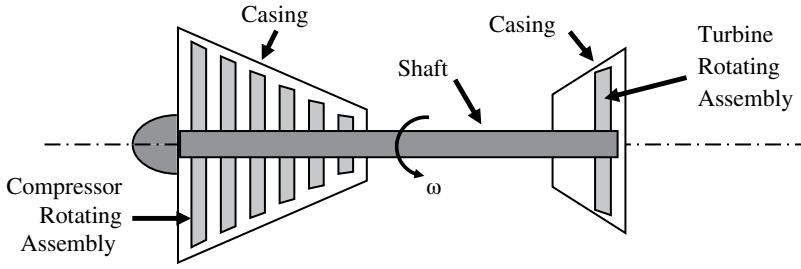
Common shaft in a gas generator connects the compressor and turbine (ω is the shaft angular speed in rad s^{-1} or rpm).
